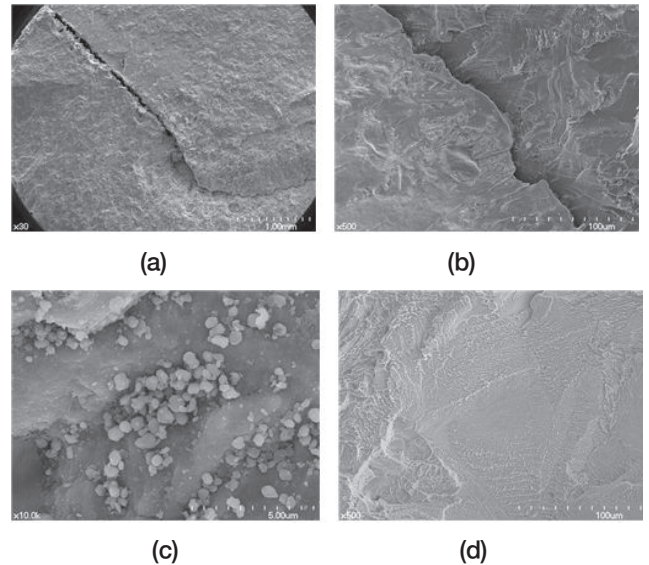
Fracture surface of dense 3D printing sample: (a) and (b) 3D printing defects were observed, (c) unbounded Ti particles were observed at the defects site, (d) plastic deformations were observed at fracture surface.
